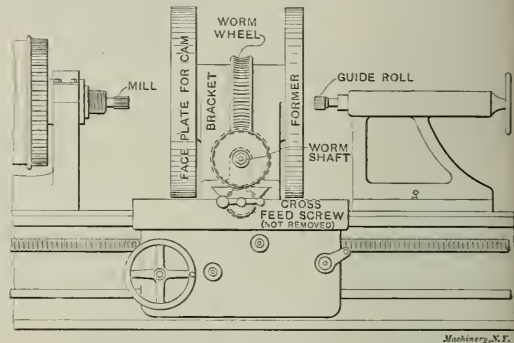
Attachment with Power Feed for Cutting Face Cams.
